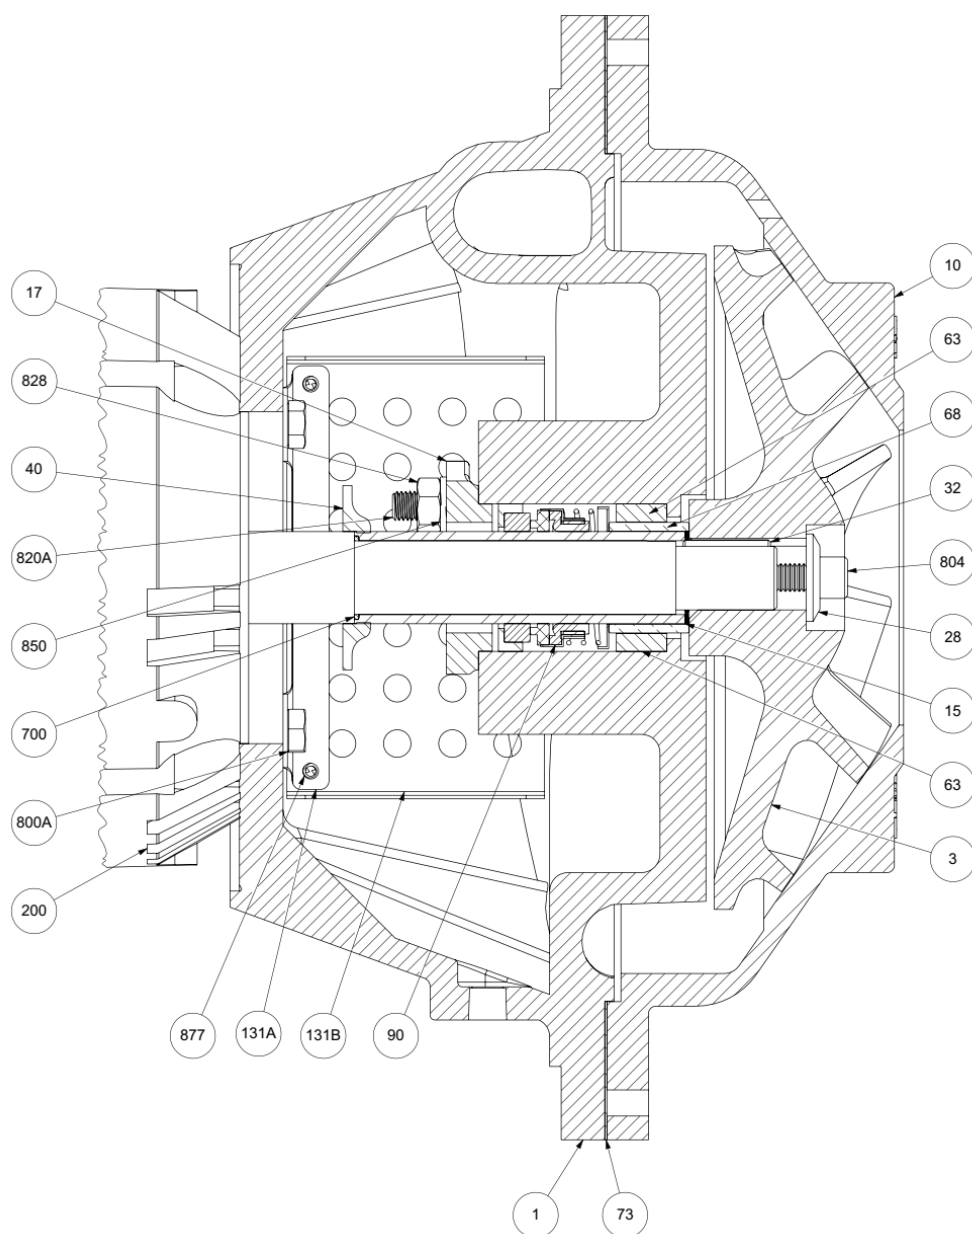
Sectional Assembly – Close-Coupled Pump (Shown with Mechanical Seal)
